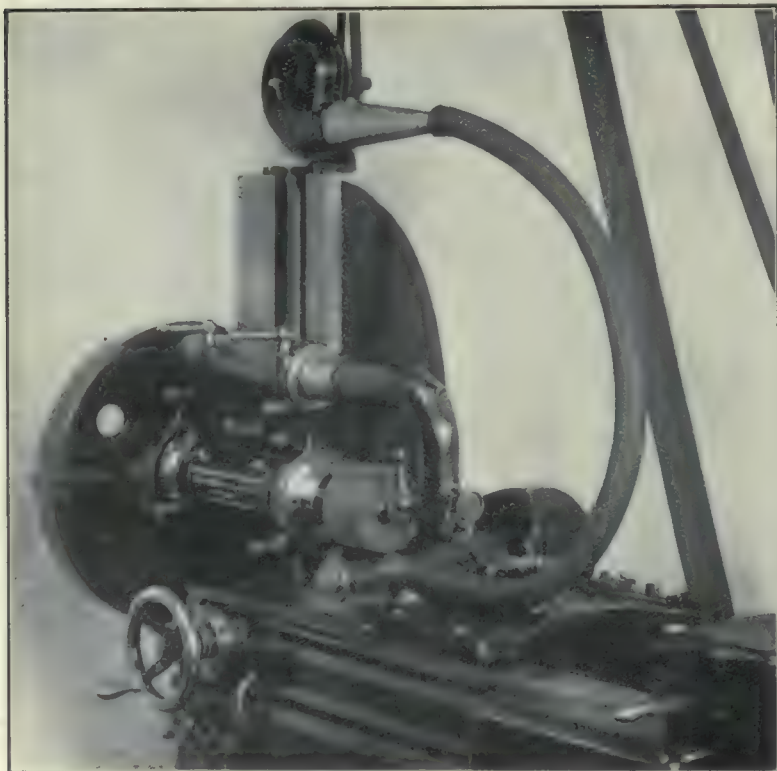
No. 3 Brown & Sharpe Automatic Gear Cutting Machine with Blower Attachment.
